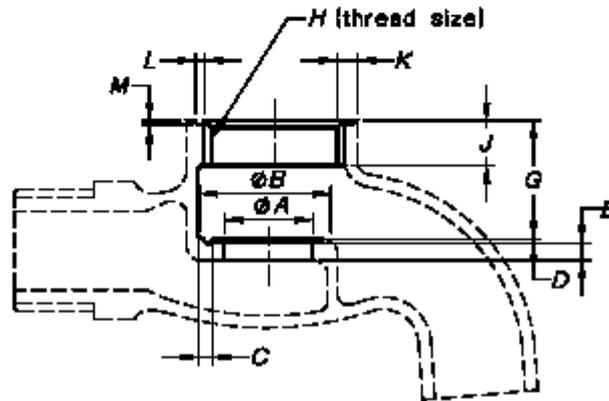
TYPICAL CROSS-SECTIONS OF BIB TAP ASSEMBLIES
